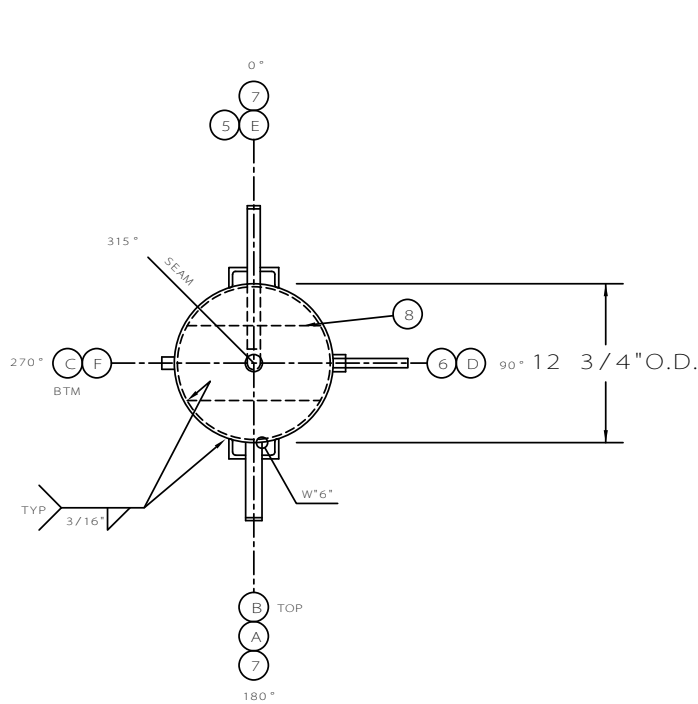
°) VALVE LAYOUT FOR OIL POT
